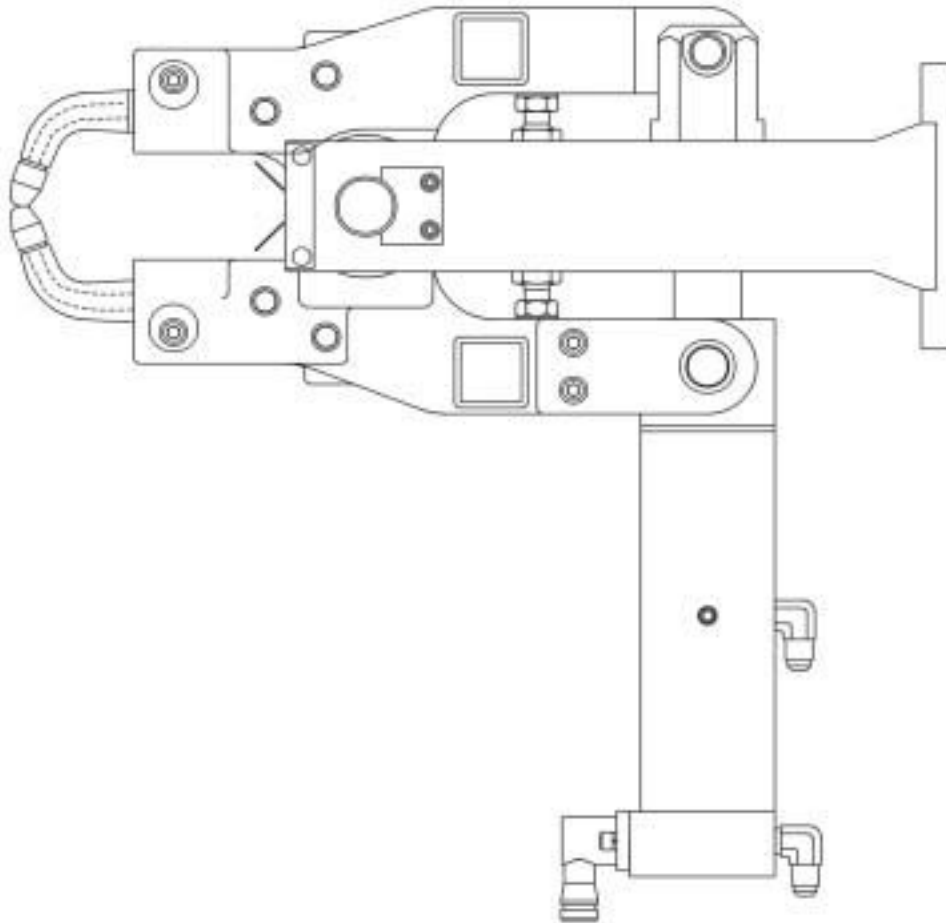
Fixture Style, Scissor-Type Gun wo/Transformer
